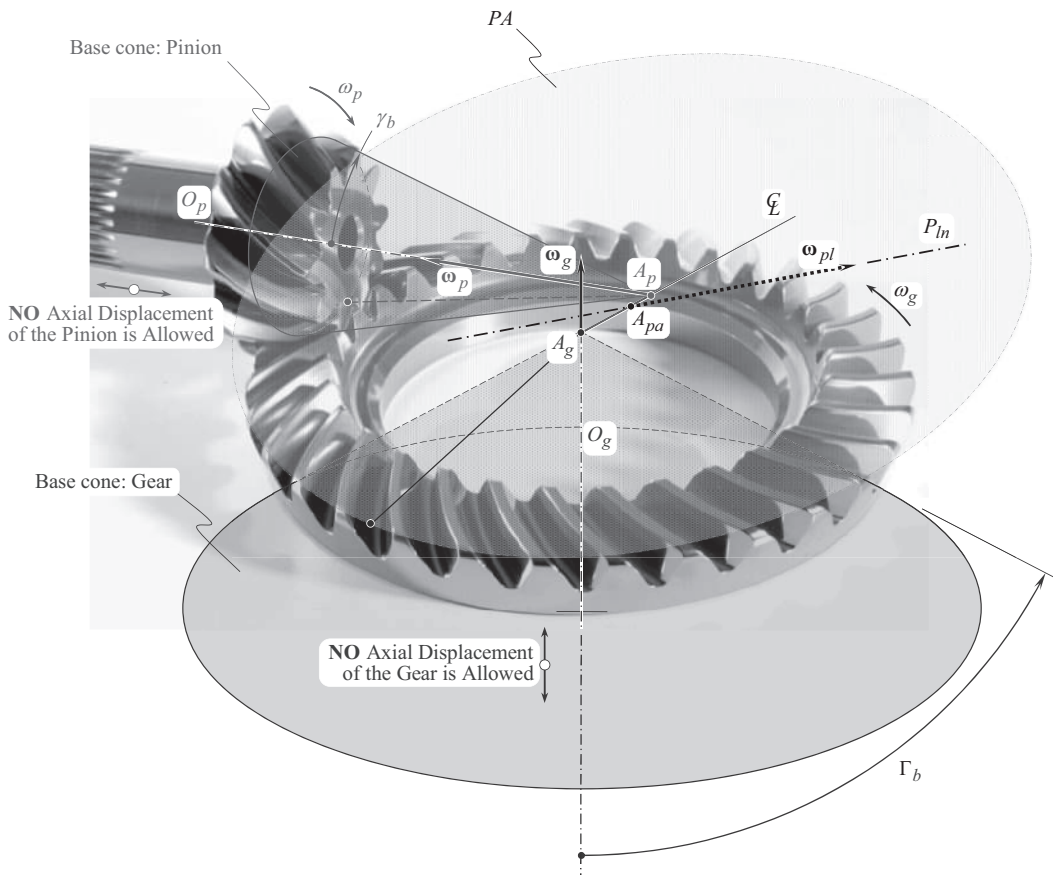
Crossed-axes gearing with associated base cones of a gear and that of a mating pinion.
